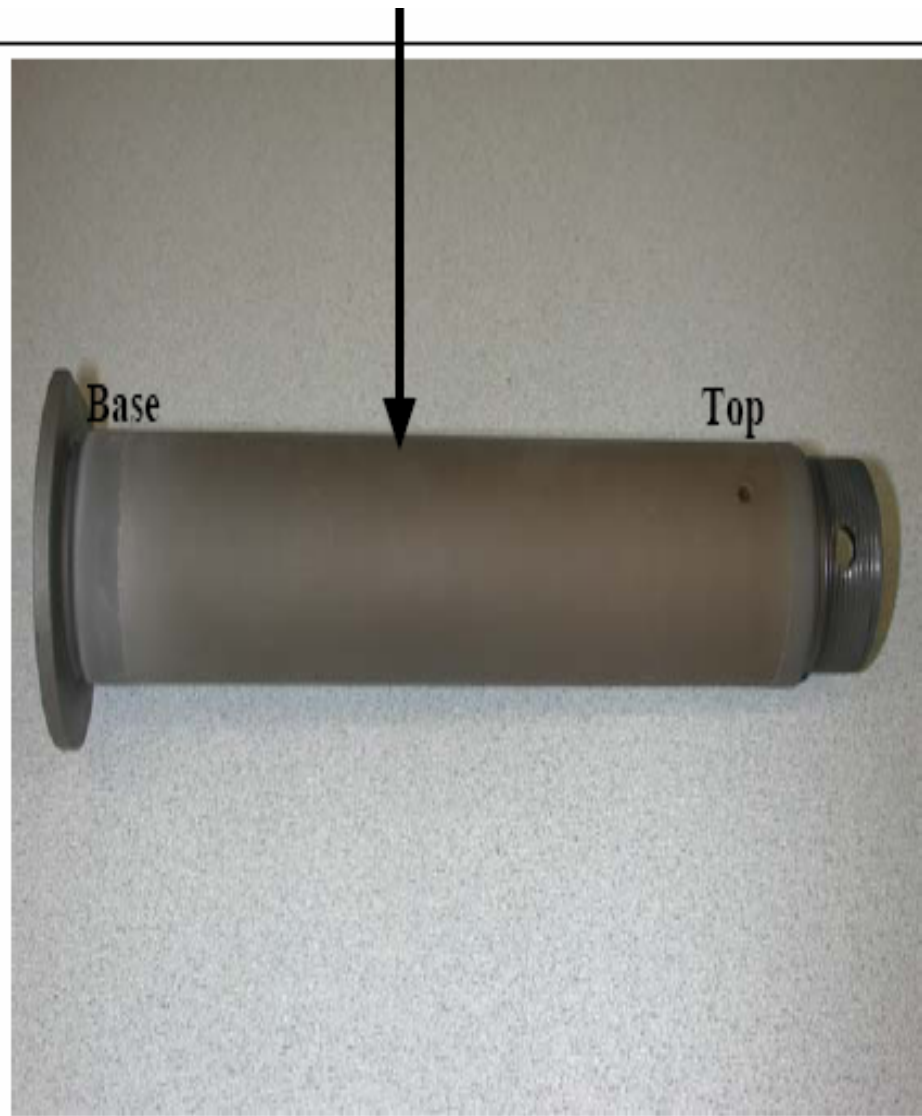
Pin in Turning Assembly with Jet in Position.
